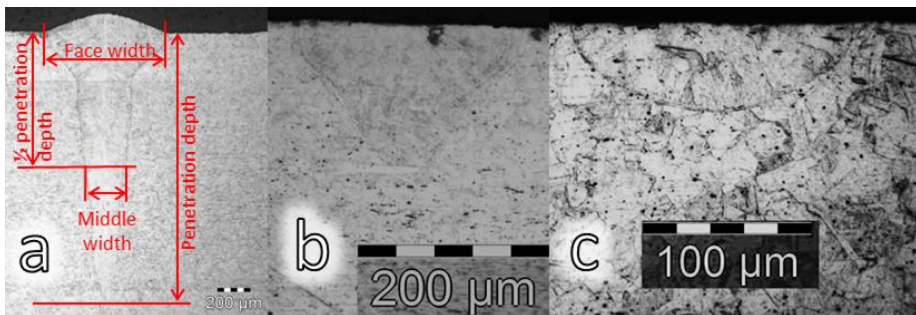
a) A classic keyhole welding. b) A weld which has just started to form a deep keyhole in the middle. c) A surface conductive welding performed with  $\varnothing 23 \mu\text{m}$  spot 1 mm from ideal focus position.
